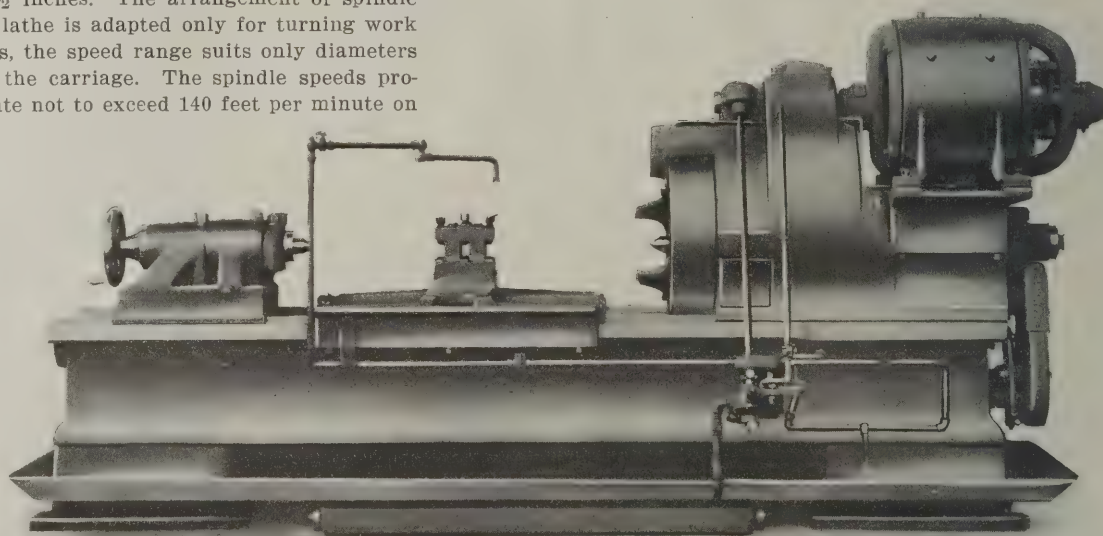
Rear View of Forge Lathe showing Separate Pumps for Oiling Headstock and Supplying Lubricant to Cutting Tool
